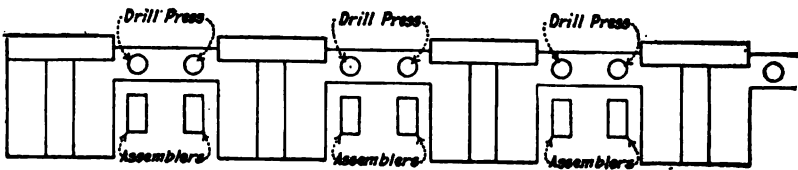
Example of Rearranging Drill Presses to Suit the Needs of Assemblers
